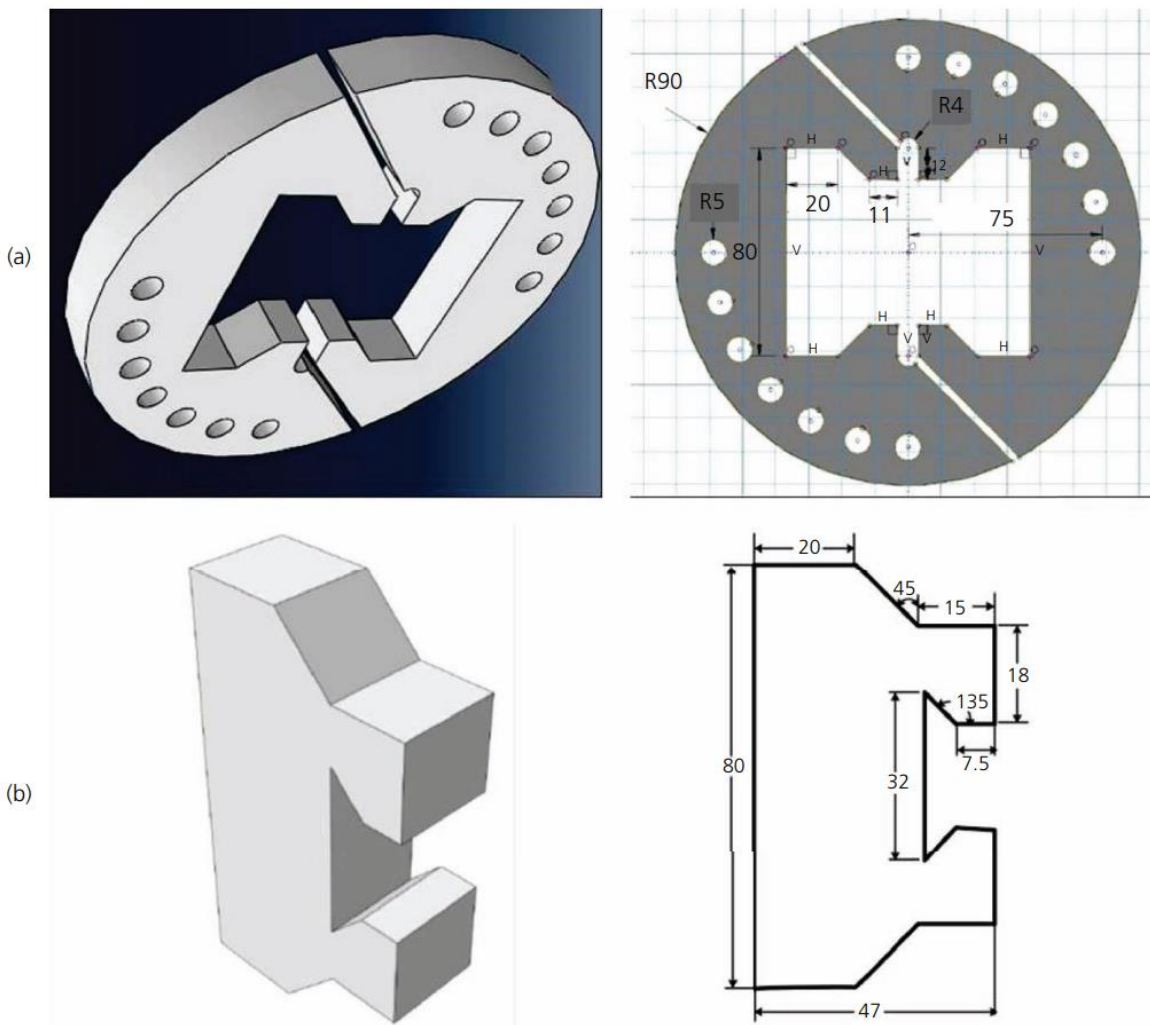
(a) Dimensions of outer fixture (mm) (b) Dimensions of inner fixture[67]
